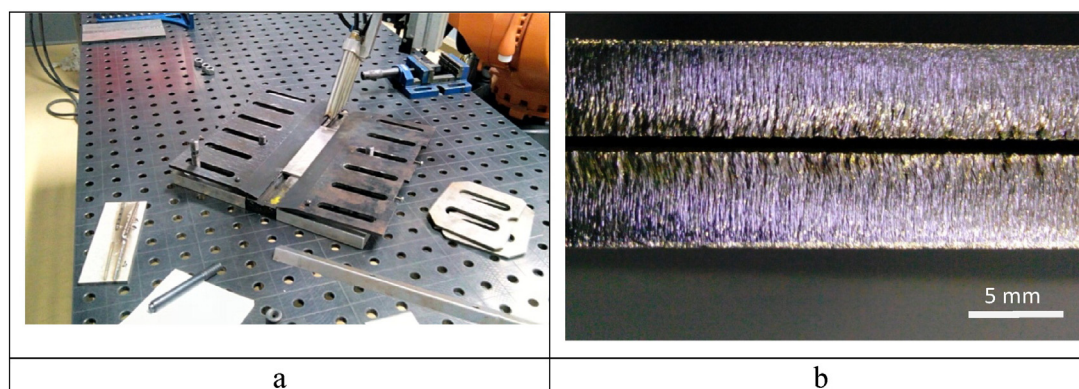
a – Photo of workpieces before welding and b – quality of edge surfaces before welding.
